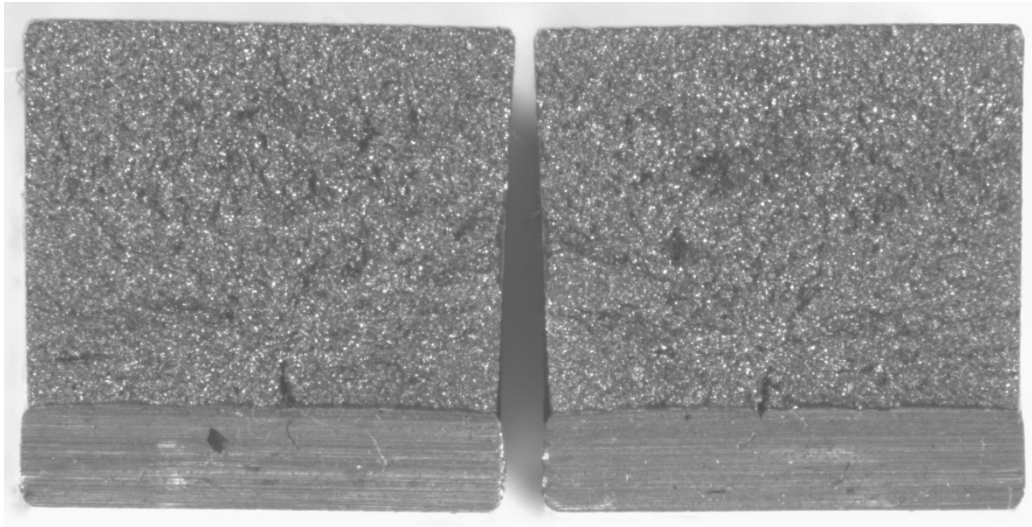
Photograph of fracture surface of Charpy V-notch Specimen 2A1 tested at lower temperature (see Figure 2.4.1-2).
